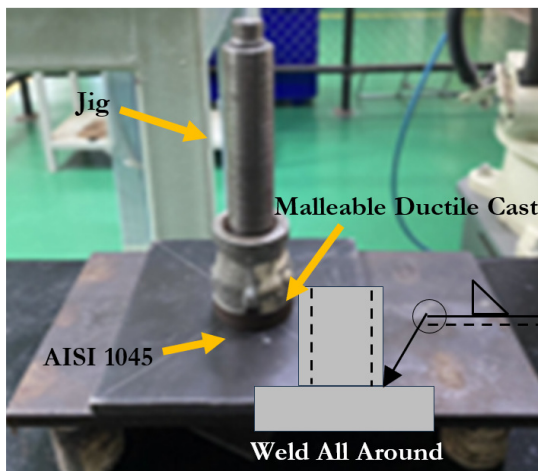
Specimens of malleable ductile cast iron and AISI 1045 steel used for robotic welding of dissimilar materials.
